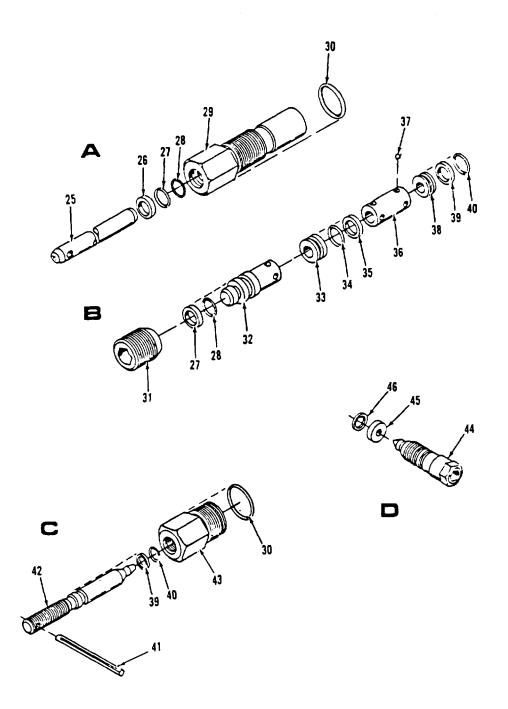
HYDRAULIC PUMP (SHEET 2 OF 2)
